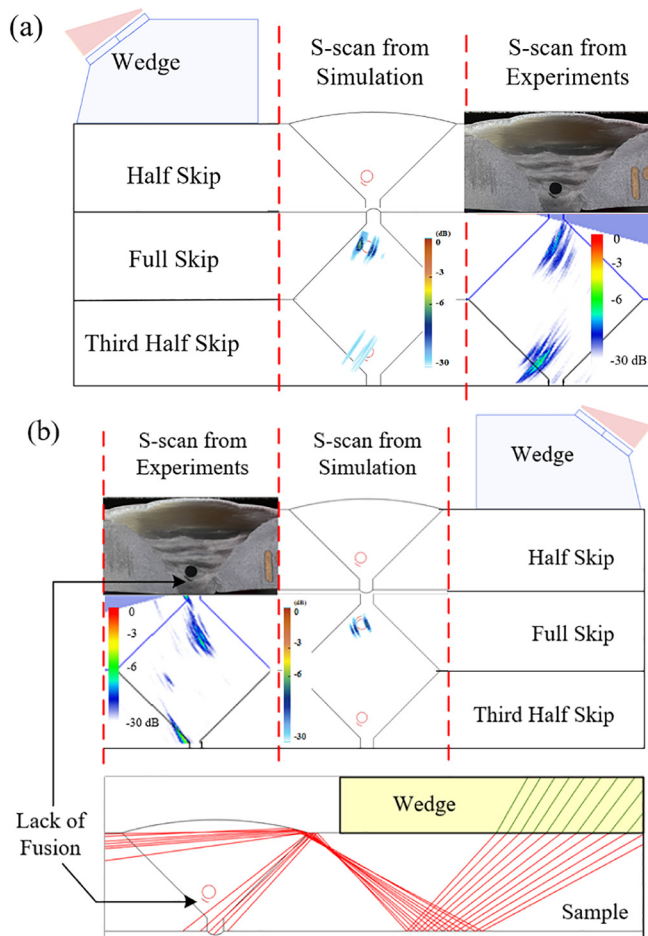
CIVA simulated and experimentally recorded S-scans of the T1 welded sample containing a tungsten rod and a lack of fusion when the weld section is inspected from sides (a) 1 and (b) 2.
